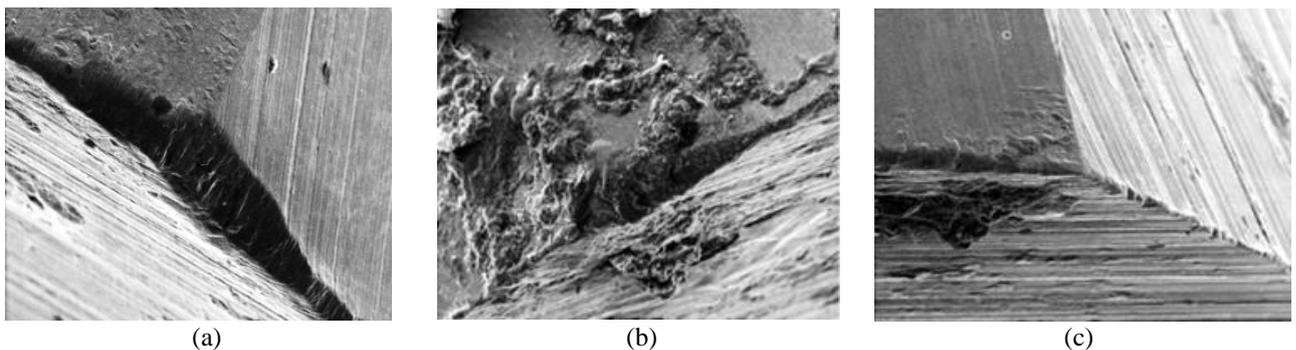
The Tool wear on the tool tip for (a) dry Cutting, (b) Petroleum based lubrication (c) gingelly oil lubrication processes
